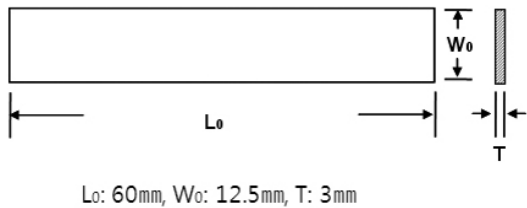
Dimensions of dynamic mechanical analysis specimen.
